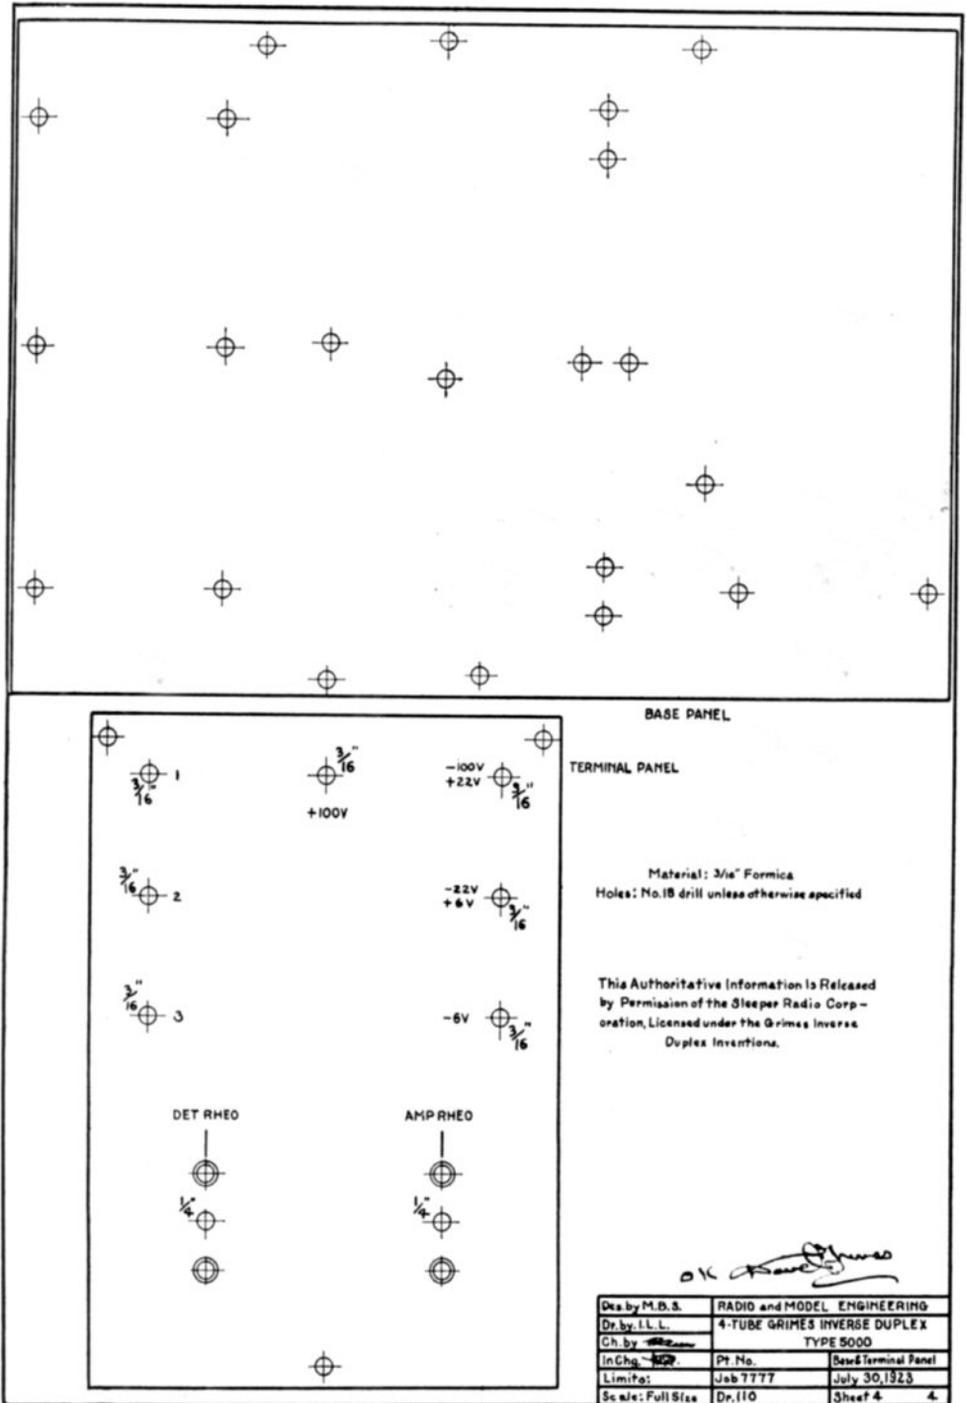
One-half scale drawing of the base and terminal panels. Engraving for the binding posts is also indicated
